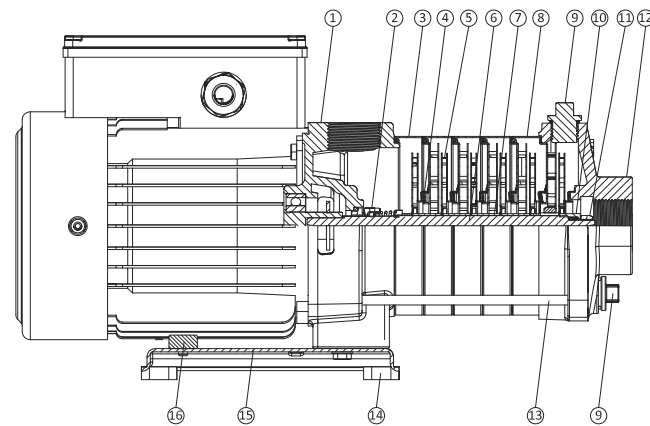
SH, SHI & SHN 4 with SMG 80 motor
